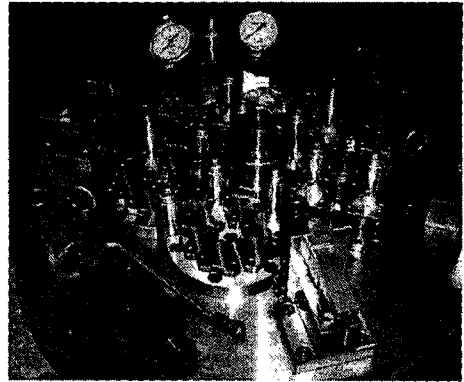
Jig of static pressure supporter for SiC light-weight mirror machining
